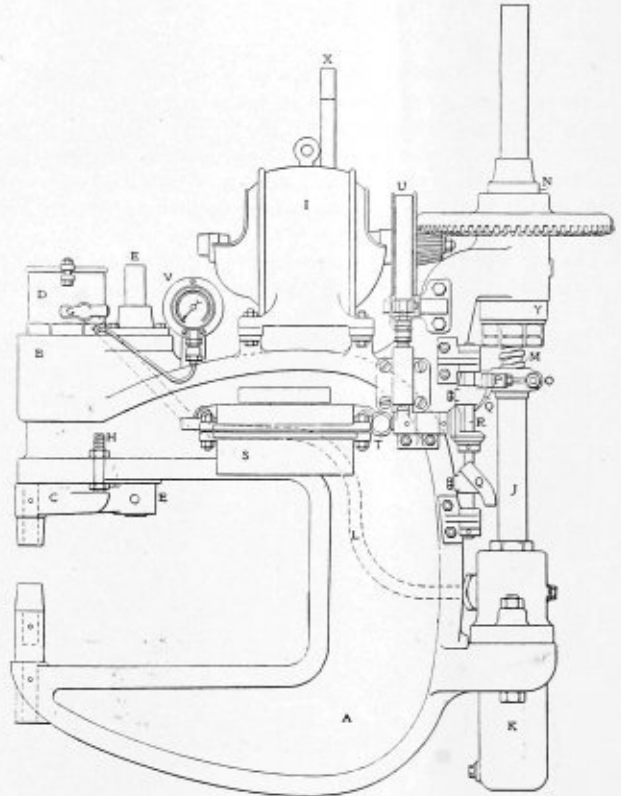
ARRANGEMENT OF ELECTRIC-HYDRAULIC RIVETER.
